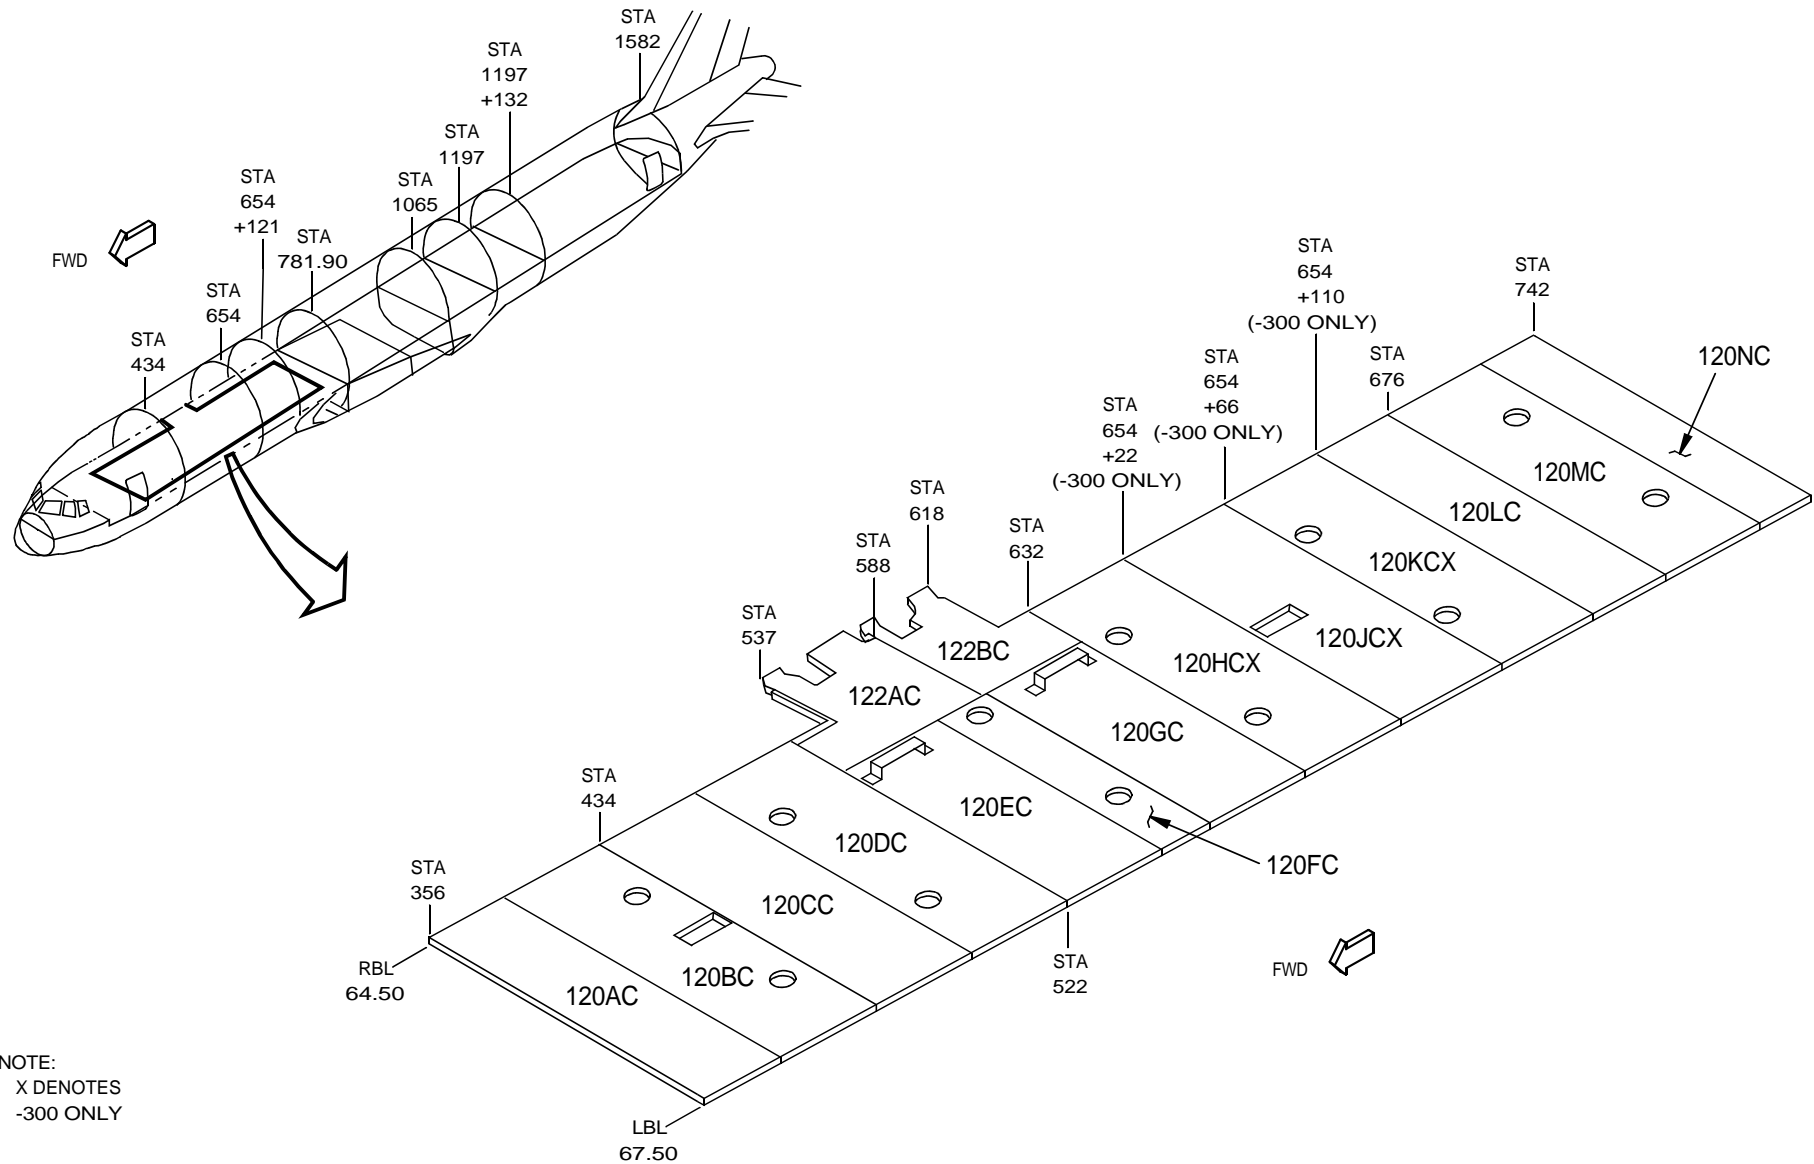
SUB-MAJOR ZONES 121/122 FWD CARGO COMPARTMENT CEILING PANELS - SMALL DOOR
